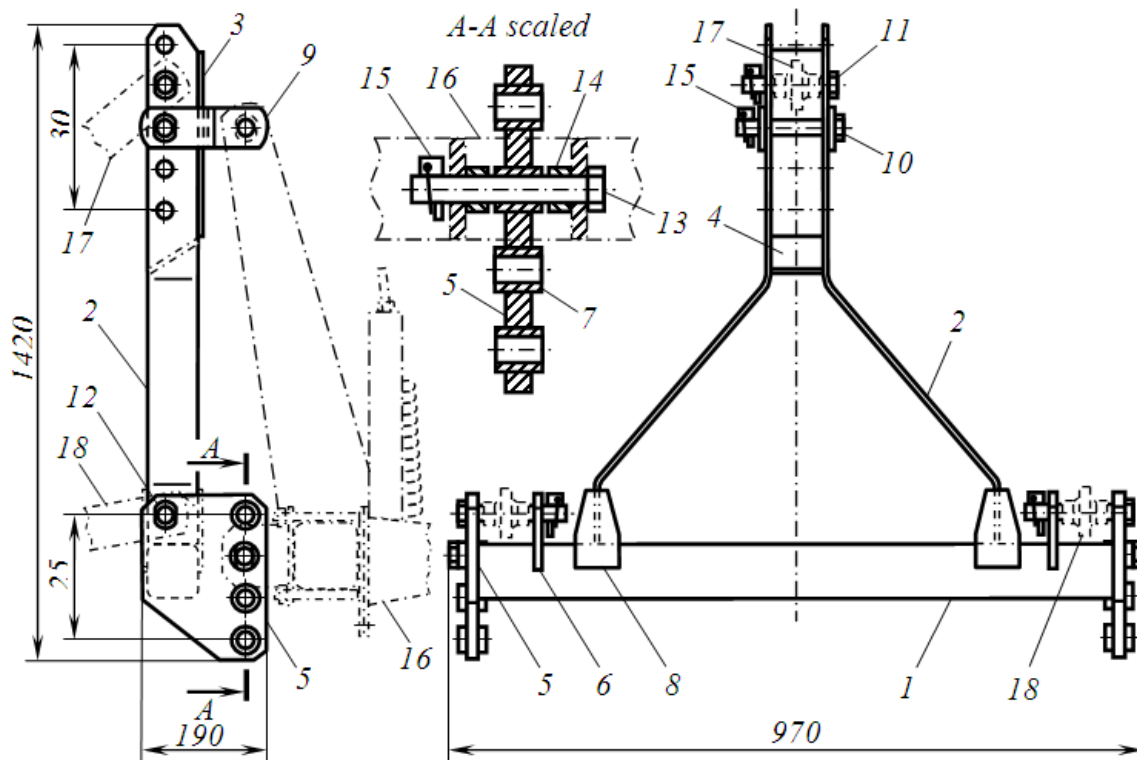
Adaptation of PN for tractor ancillary equipment for its aggregation with disc tools without a coupler: 1 - beam; 2 – diagonal stand; 3 - wall; 4 - strut; 5 and 6 – frontal and inner eyelets; 7 - liner; 8 - kneepiece; 9 - clip; 10, 11, 12, 13 - fingers; 14 - ring; 15 - lock; 16 - cultivator; 17 and 18 - upper and lower links of tractor ancillary equipment.
